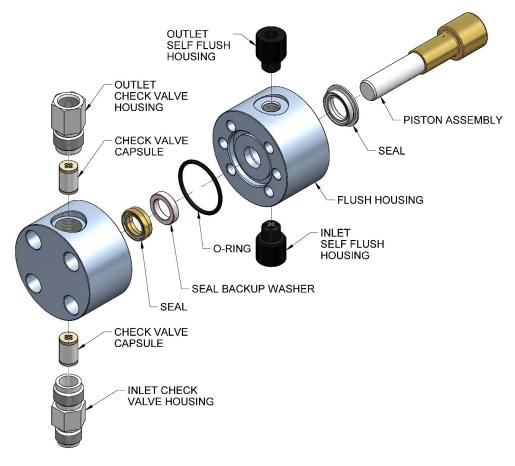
Stainless Steel Self-Flushing Pump Head Assembly
